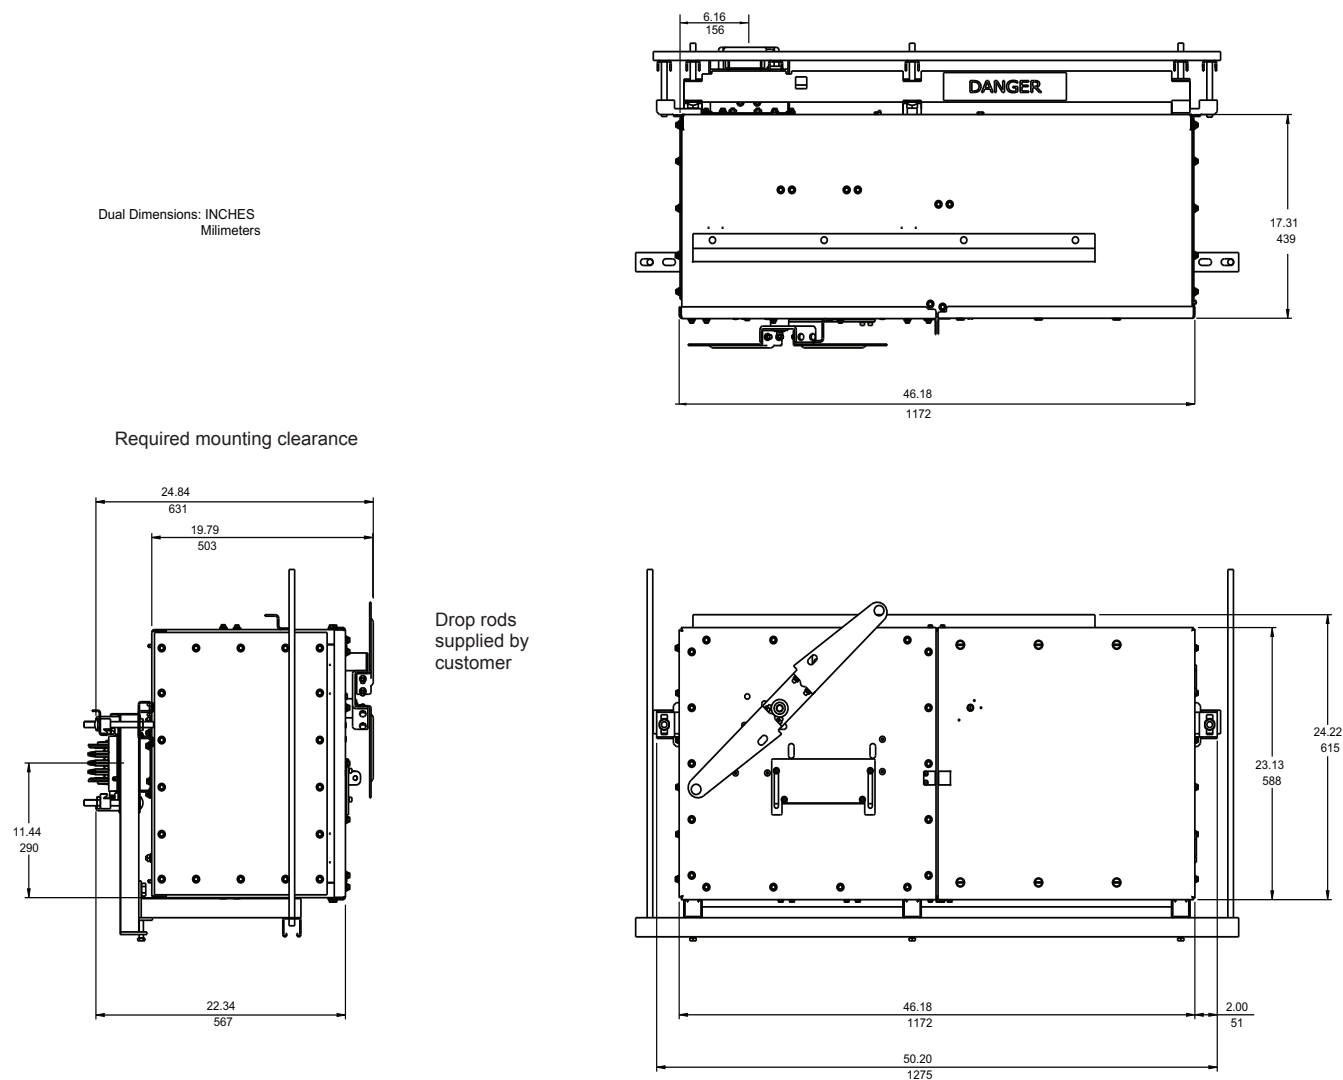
Circuit Breaker Bolt-On Units (Horizontally Mounted)—600–1600 A
